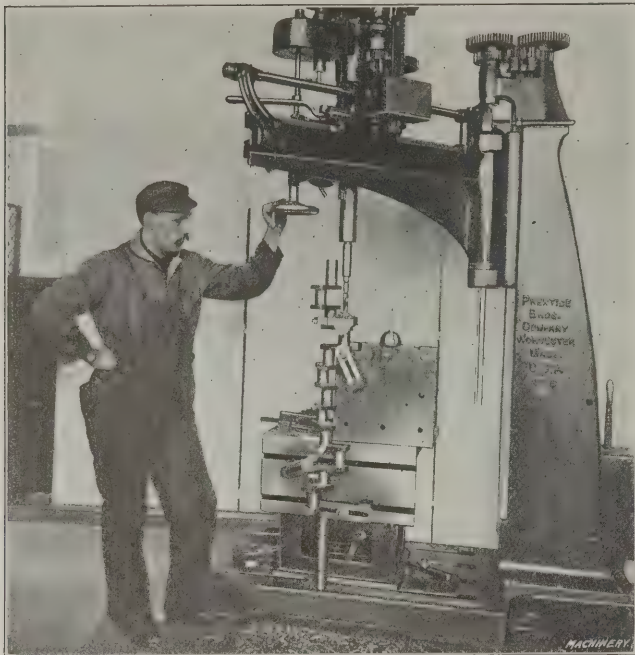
Drilling out the Pins of the Hollow Crankshaft
